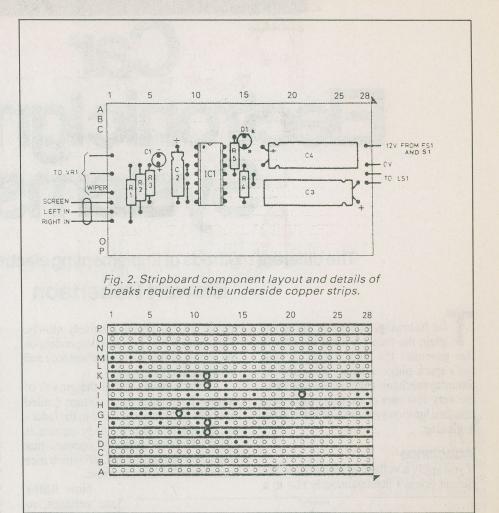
Stripboard component layout and details of breaks required in the underside copper strips.
